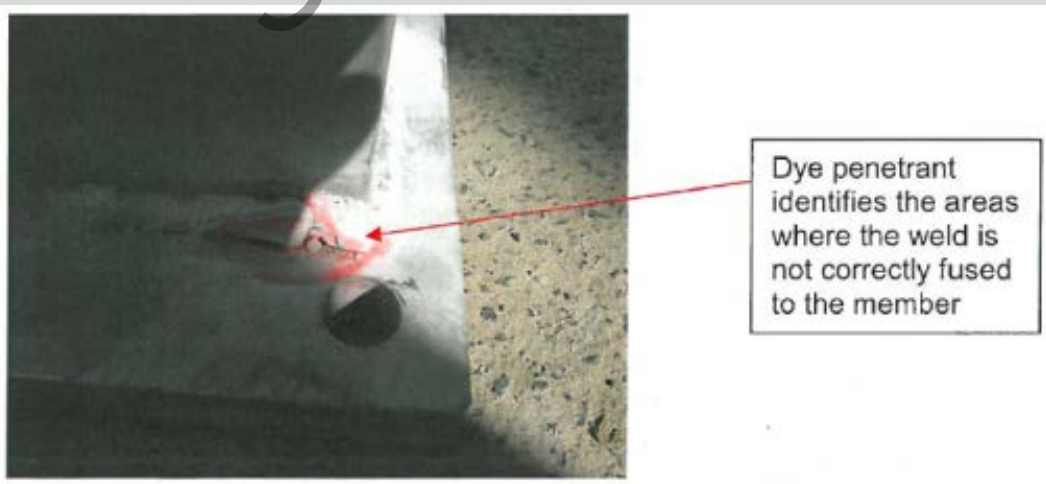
(d) - View of the lack of fusion to the weld defect
